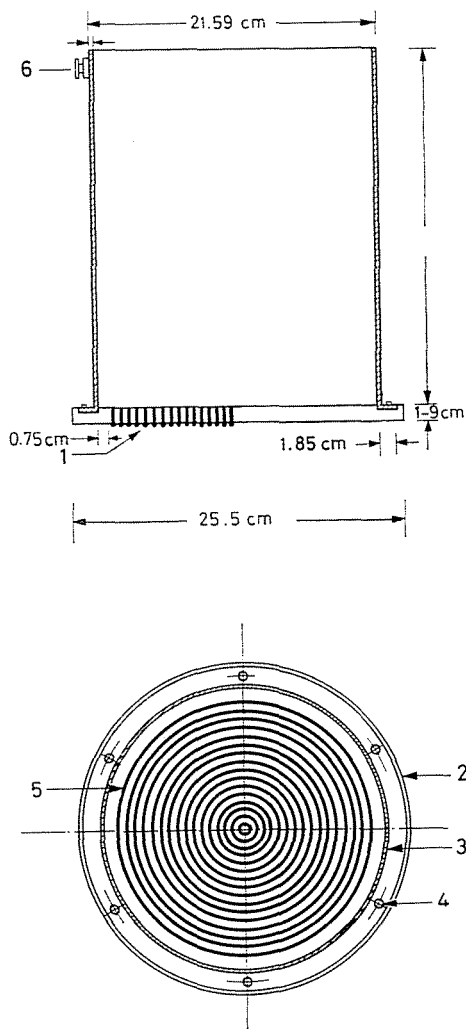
Detailed drawing of the Electrolytic cell. 1. Electrical connections, from sixteen ring electrodes; 2. Hylam bottom plate with copper ring electrodes fixed flush with it; 3. Copper cylindrical shell; 4. Holes for fixing nuts and bolts; 5. Copper ring electrodes (sixteen in all); 6. Plug for outer wall-electrode
